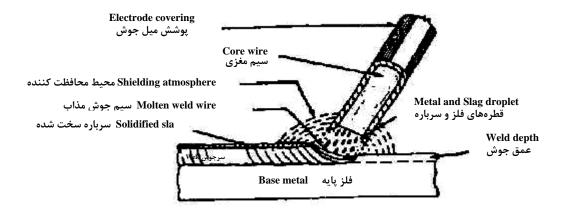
SHIELDED METAL ARC WELDING شکل ۴- جوشکاری قوسی با فلز پوشش دار
